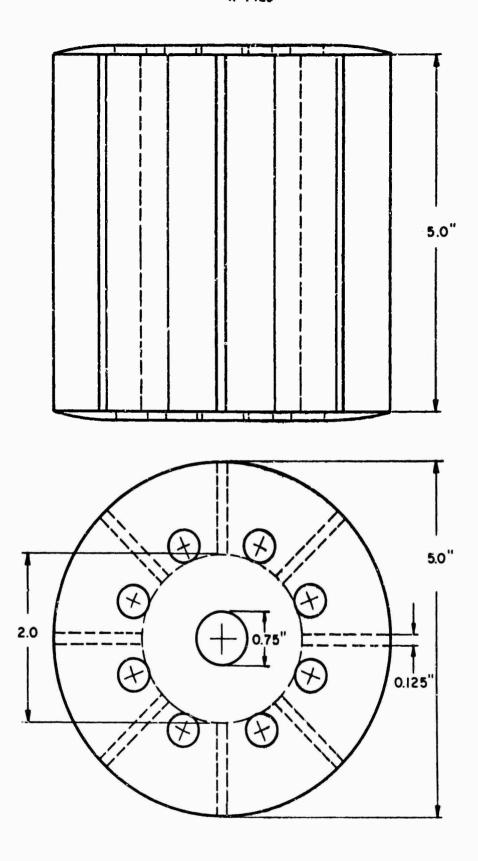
MODEL PADDLE WHEEL WITH FIXED RADIAL BLADES AND END PLATES
